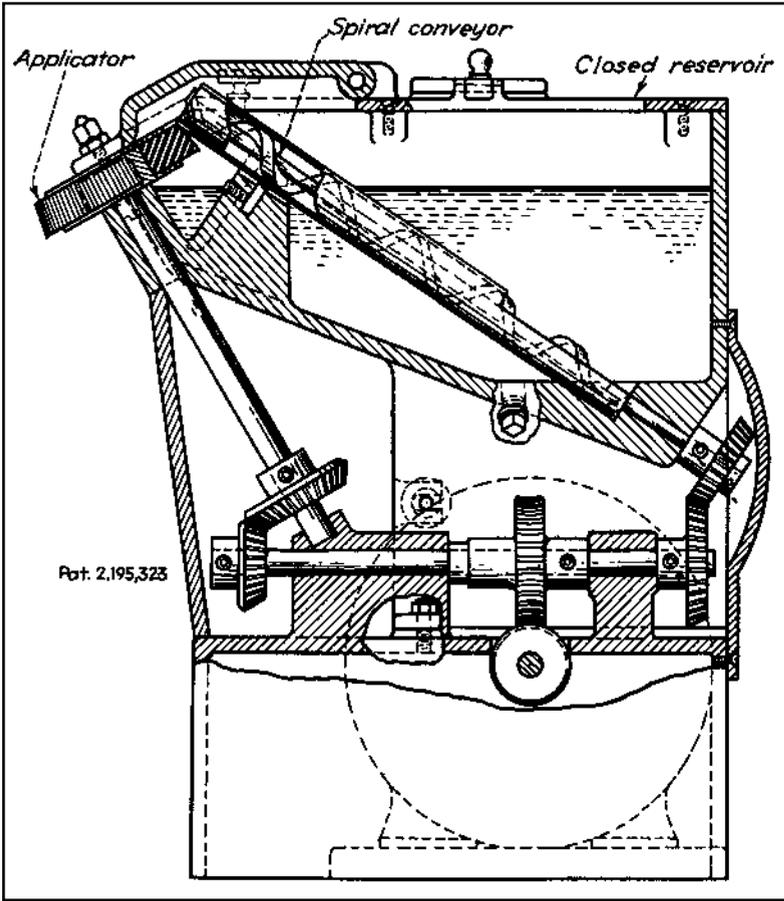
An applicator wheel is fed by a spiral conveyor.
